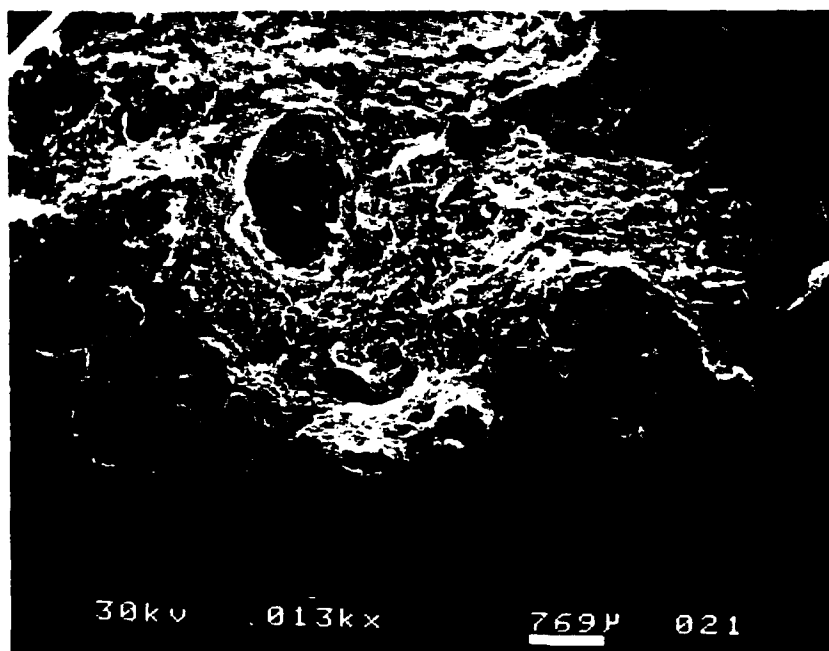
Overall fractograph of no-HIP fracture surface (13X).
